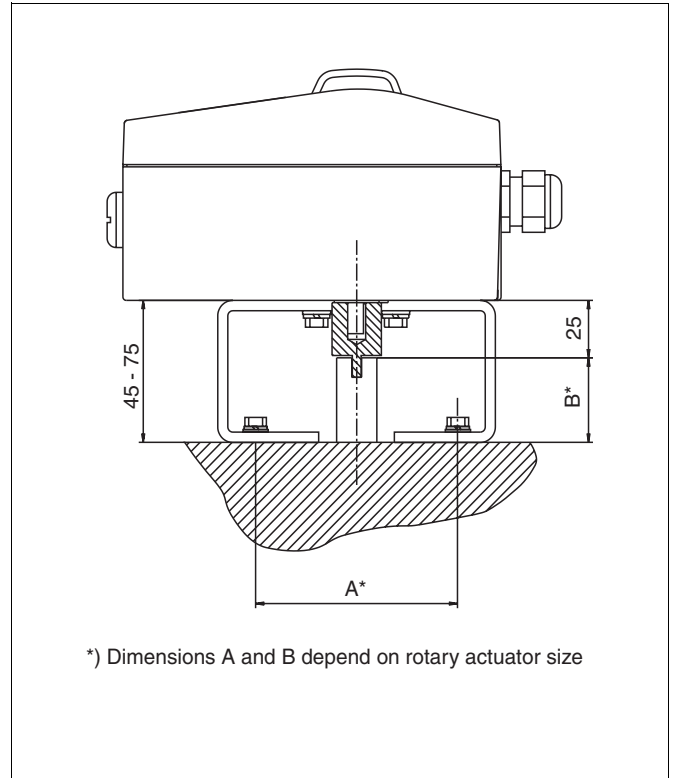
Mounting to rotary actuators to VDI/VE 3845
